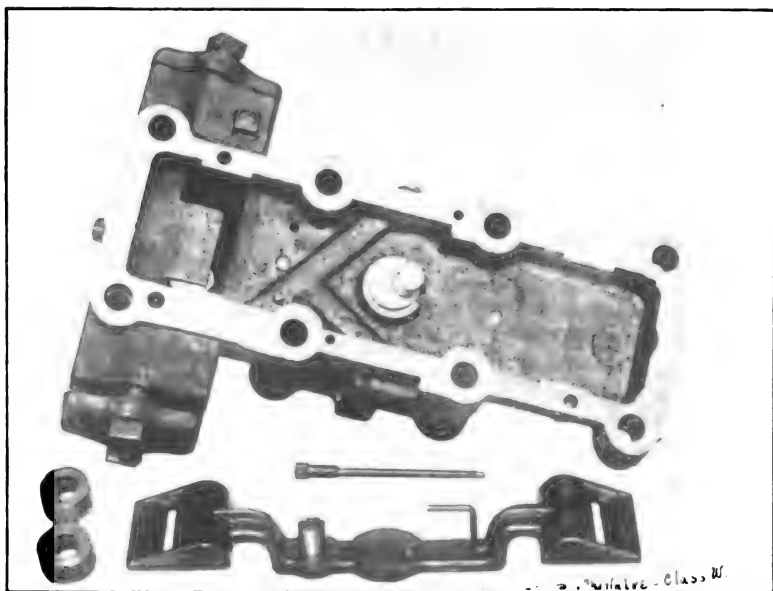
Rotary Engine for Operating Valve of Harrison Coal Pick.
